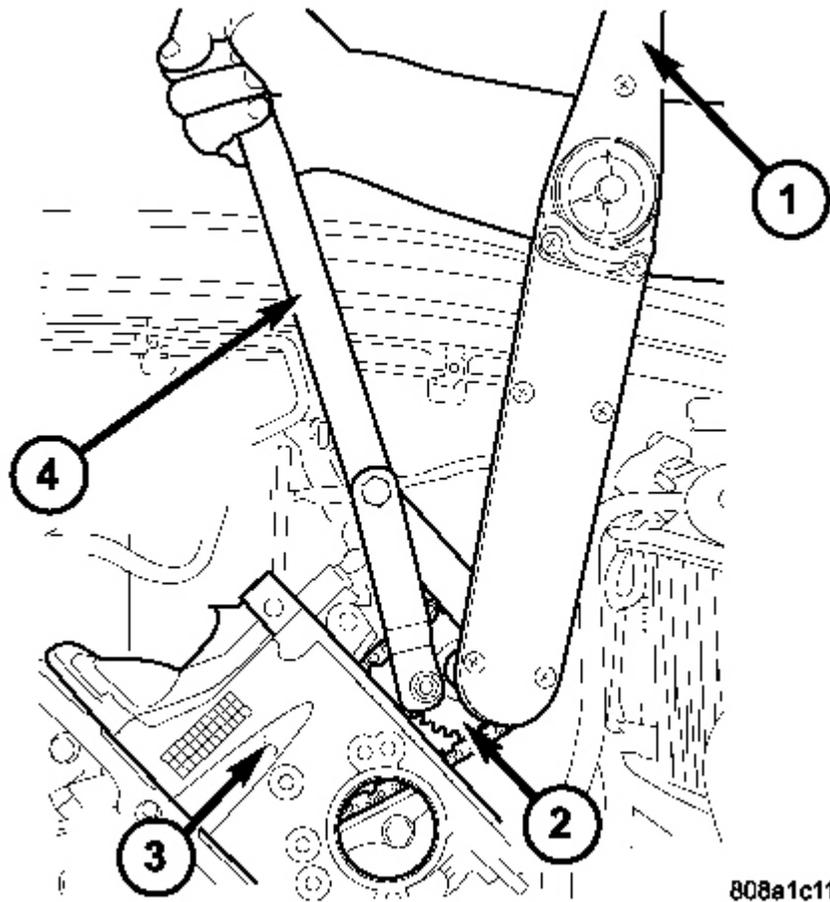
Tightening Left Side Camshaft Sprocket Bolt
